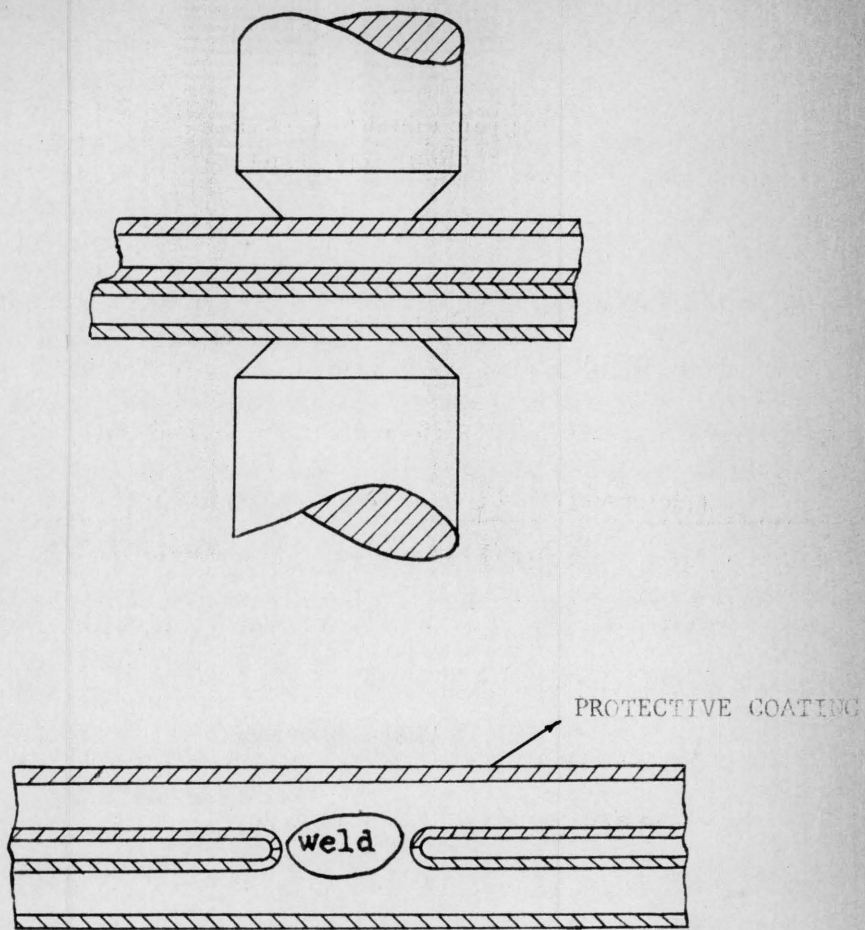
Ideal Spot Weld in Coated Steel,
